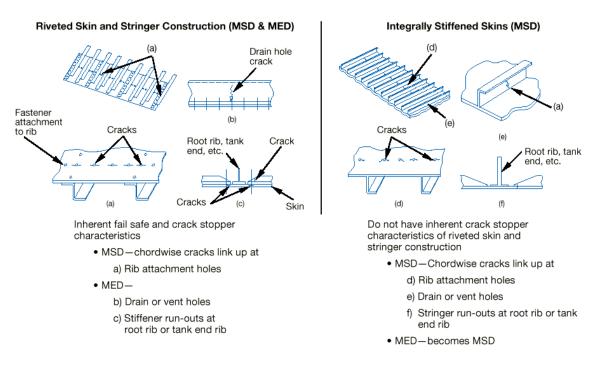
Typical wing and empennage construction (MSD/MED)
